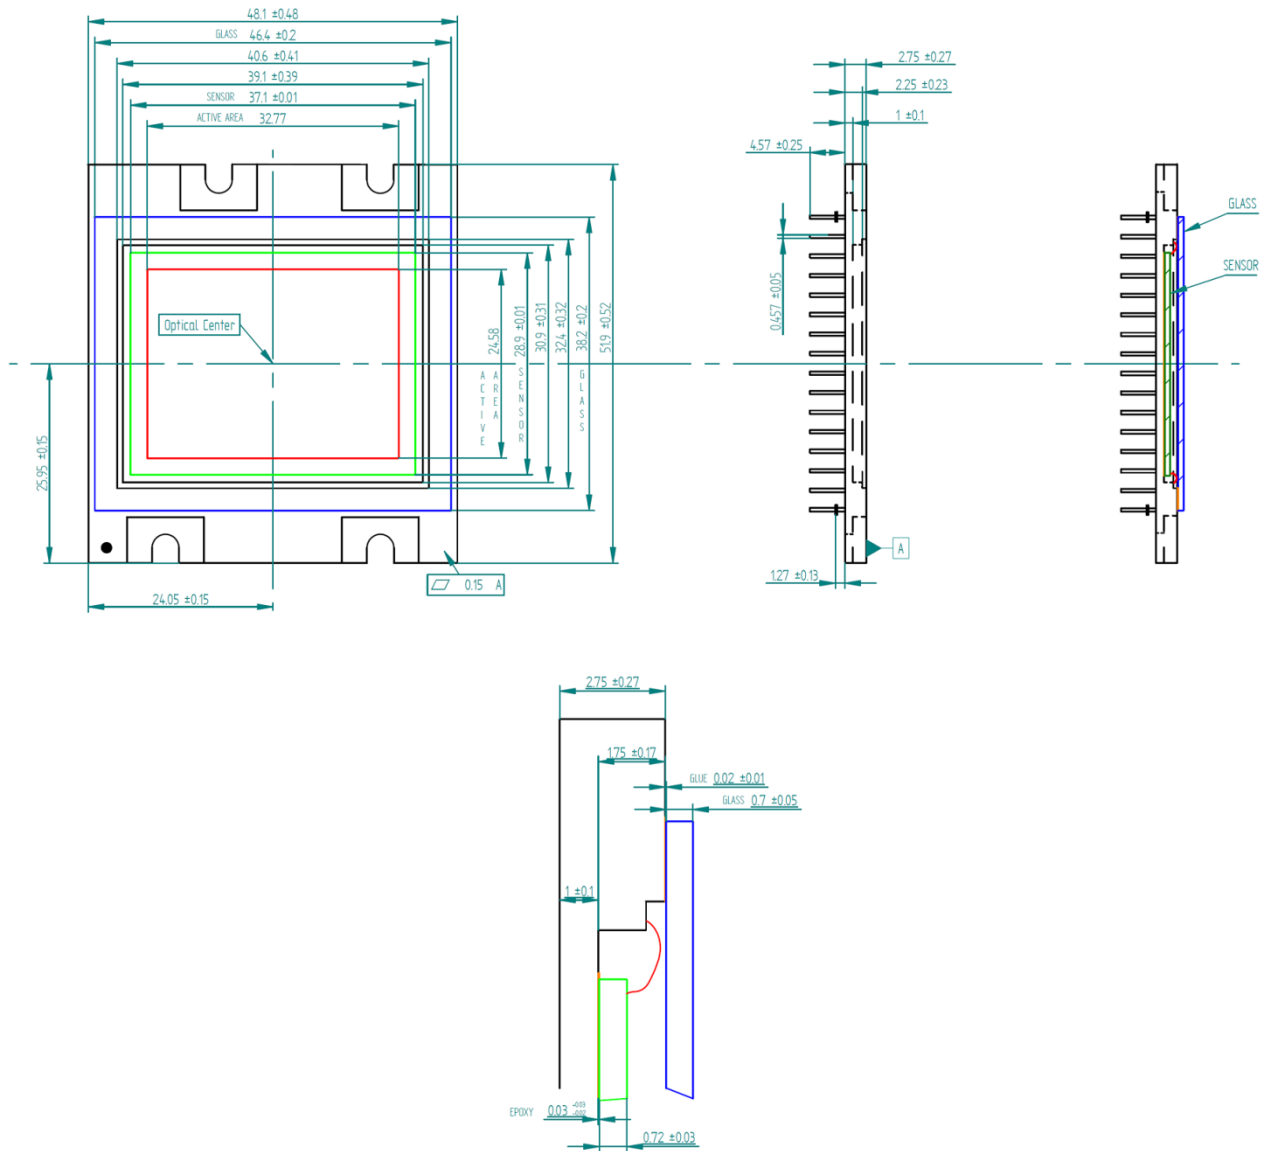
ASSEMBLY DRAWING OF CMV20000
